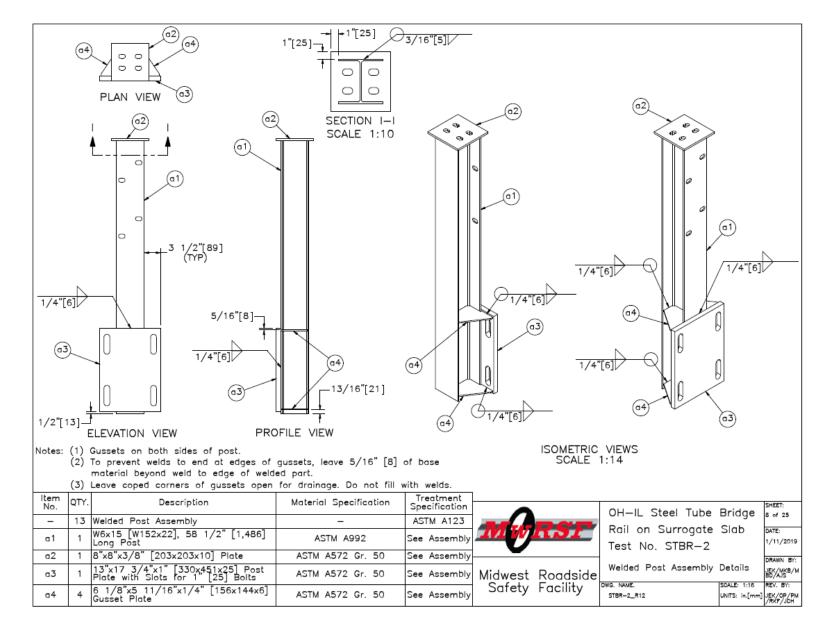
Welded Post Assembly Details, Test No. STBR-2
